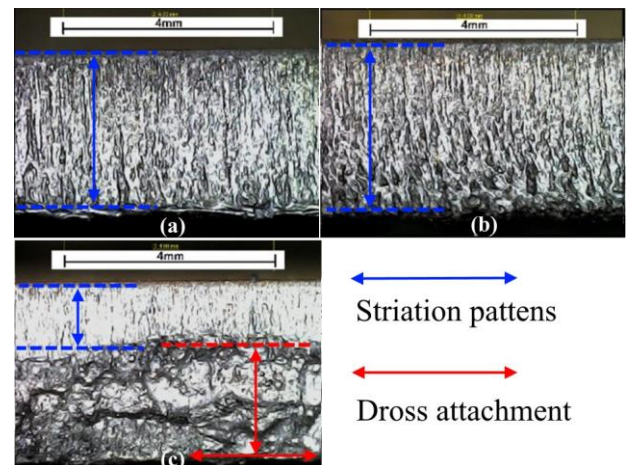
Morphology of the cut surface with a nozzle diameter of 2.0 mm and cutting speed: (a) $v = 2$ m/min; (b) $v = 3$ m/min; $v = 4$ m/min;
